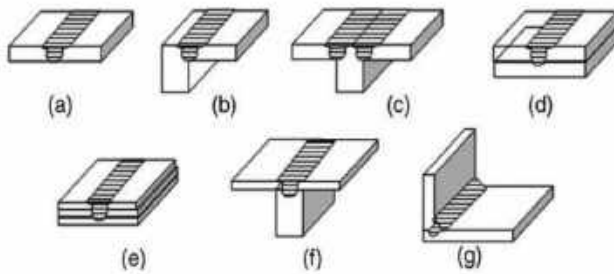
Various FSW joint configurations (a) Butt joint, (b) angle t-welding, (c) double t-welding, (d) double lap-welding, (e) triple lap-welding, (f) t-welding, (g) angle welding [2].
